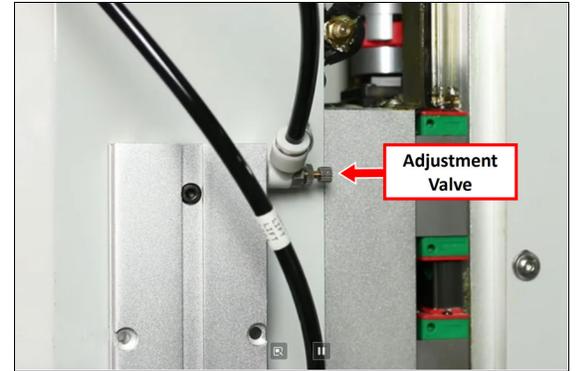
Adjustment valve on the top push-to-connect fitting of the dust shoe.
